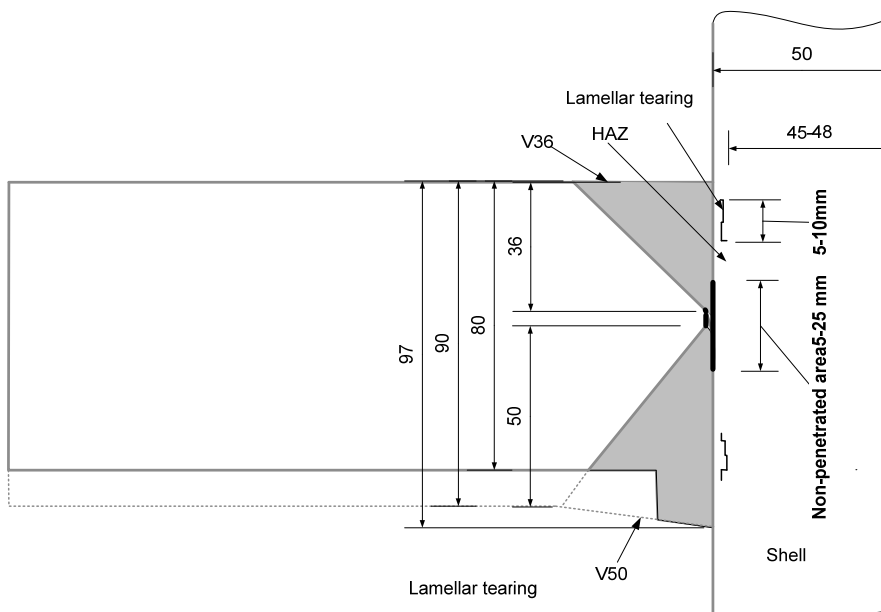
Appearance of lamellar tearing in the welded joint
